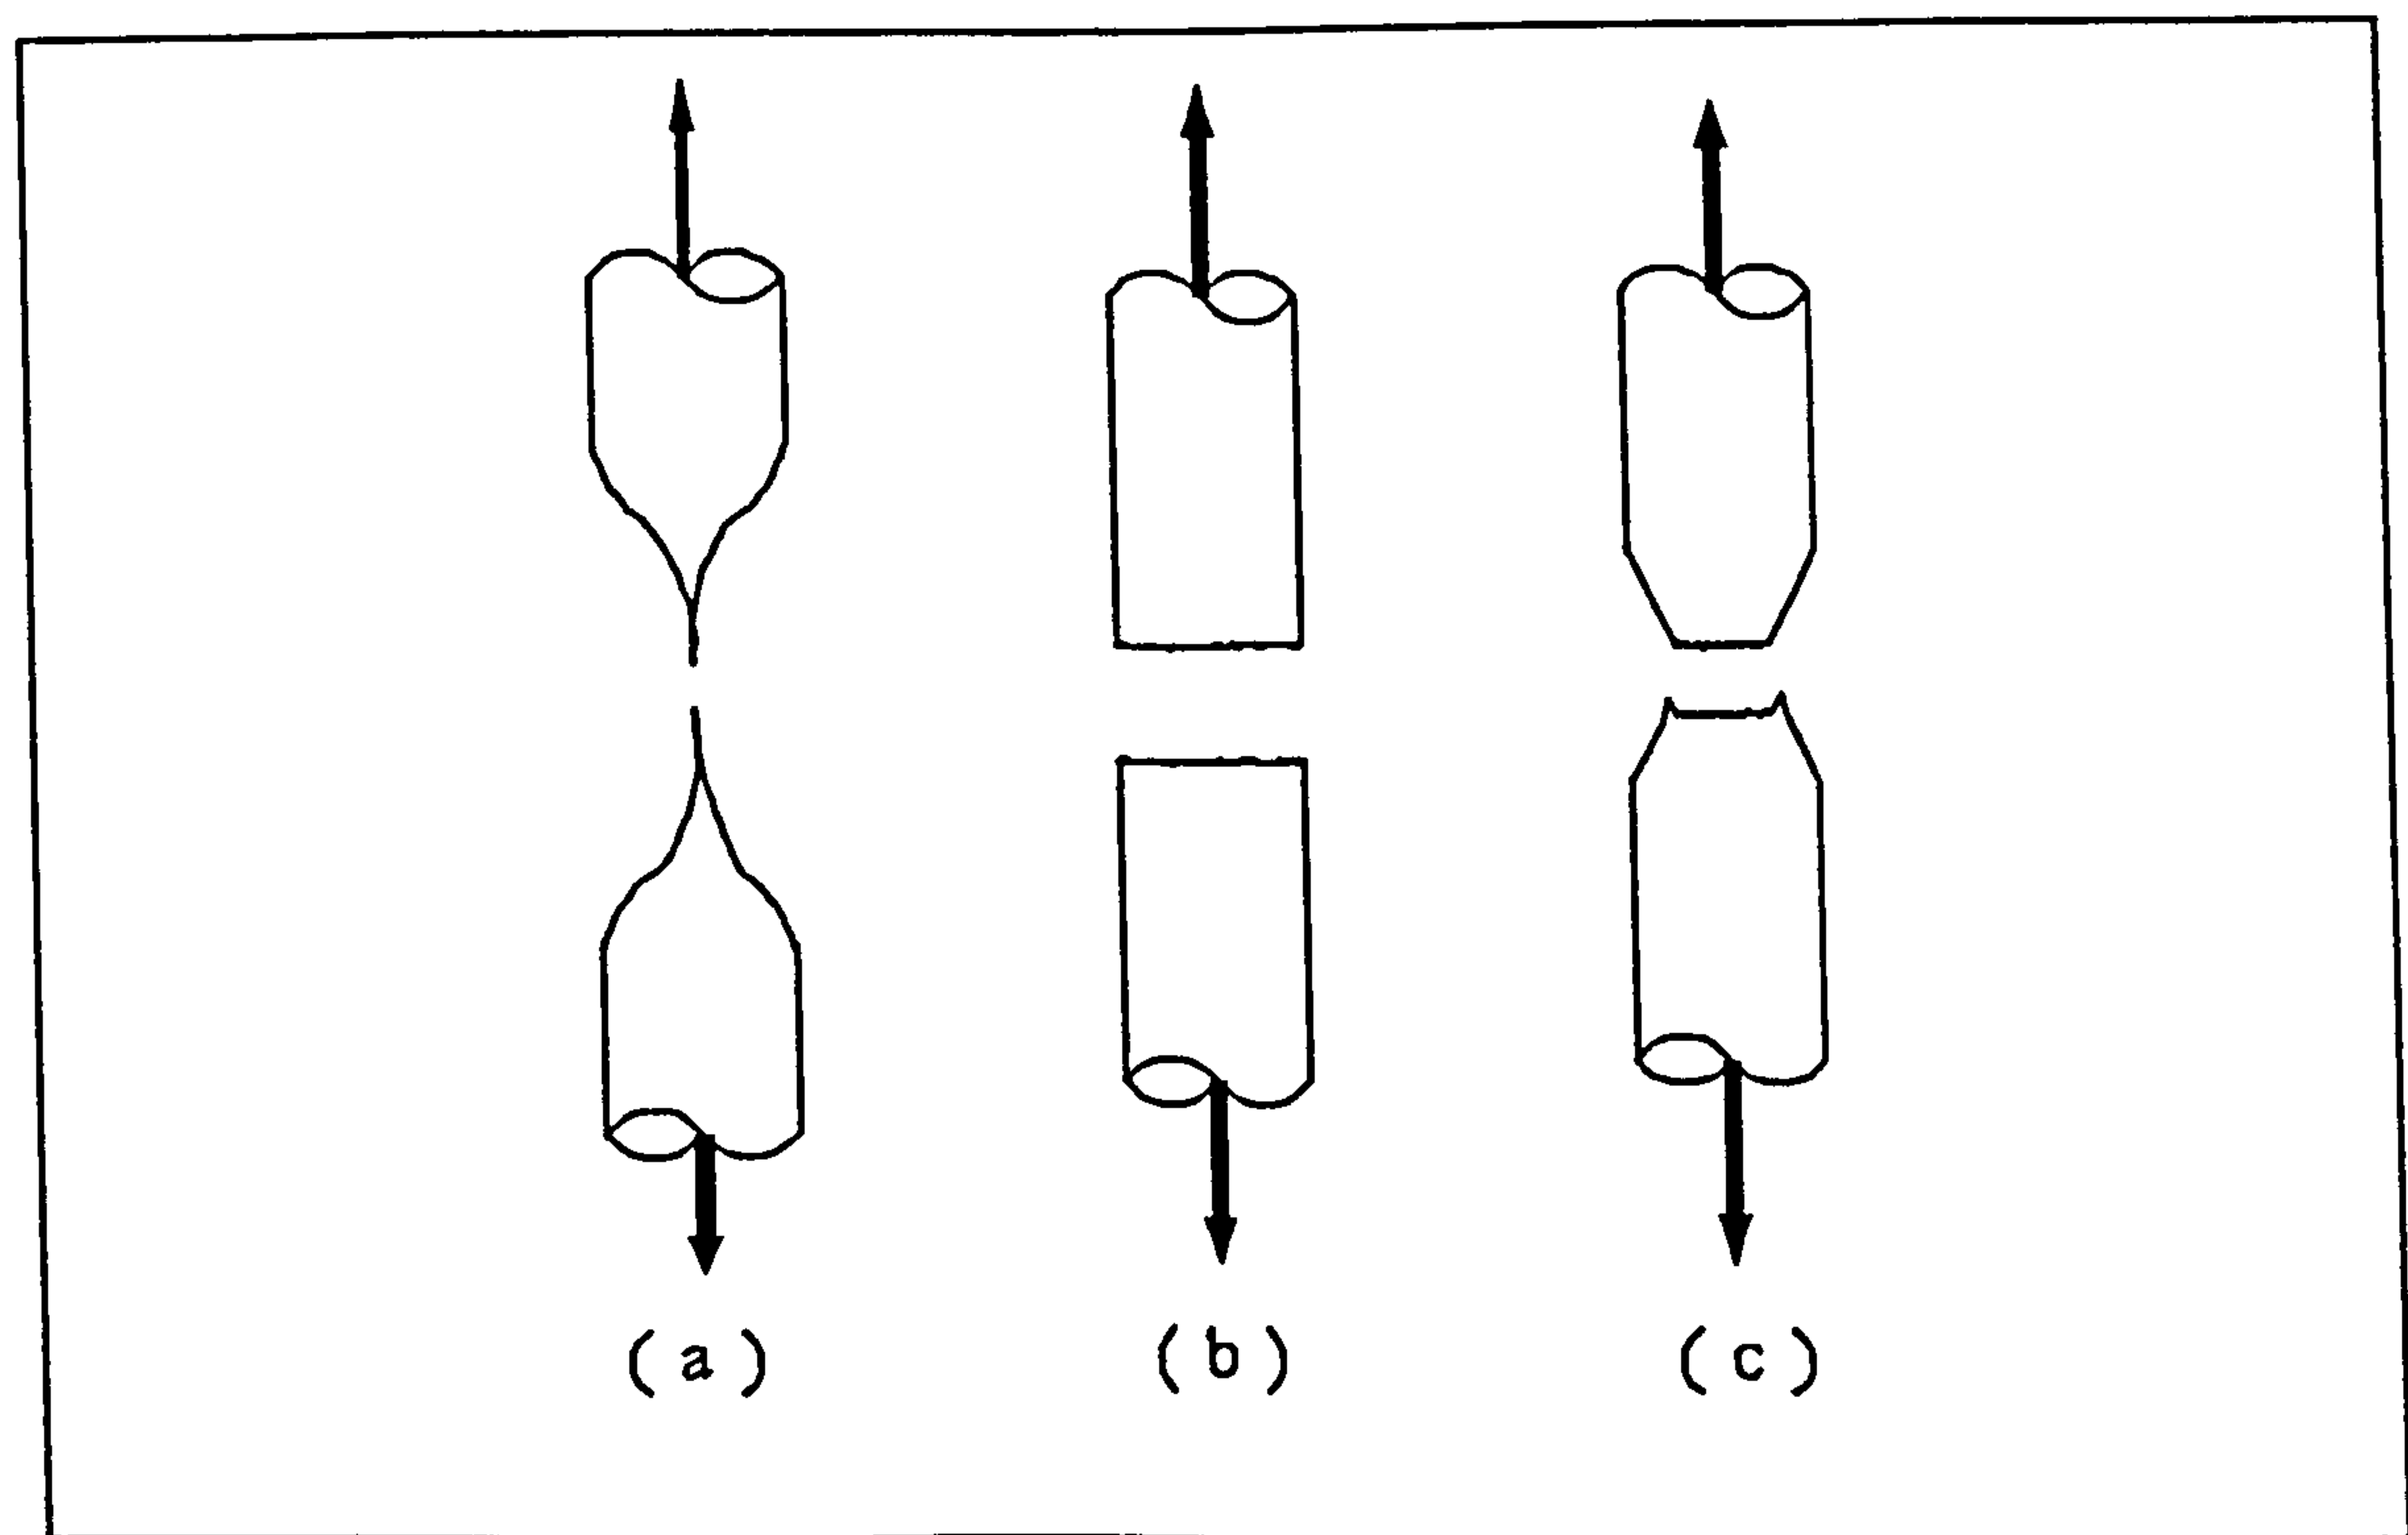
Types of fracture: (a) point; (b) flat; (c) cup and cone.
